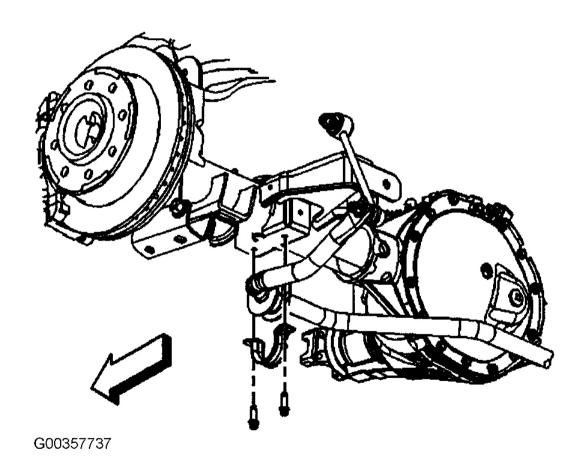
Identifying Rear Stabilizer Shaft Components Courtesy of GENERAL MOTORS CORP.
